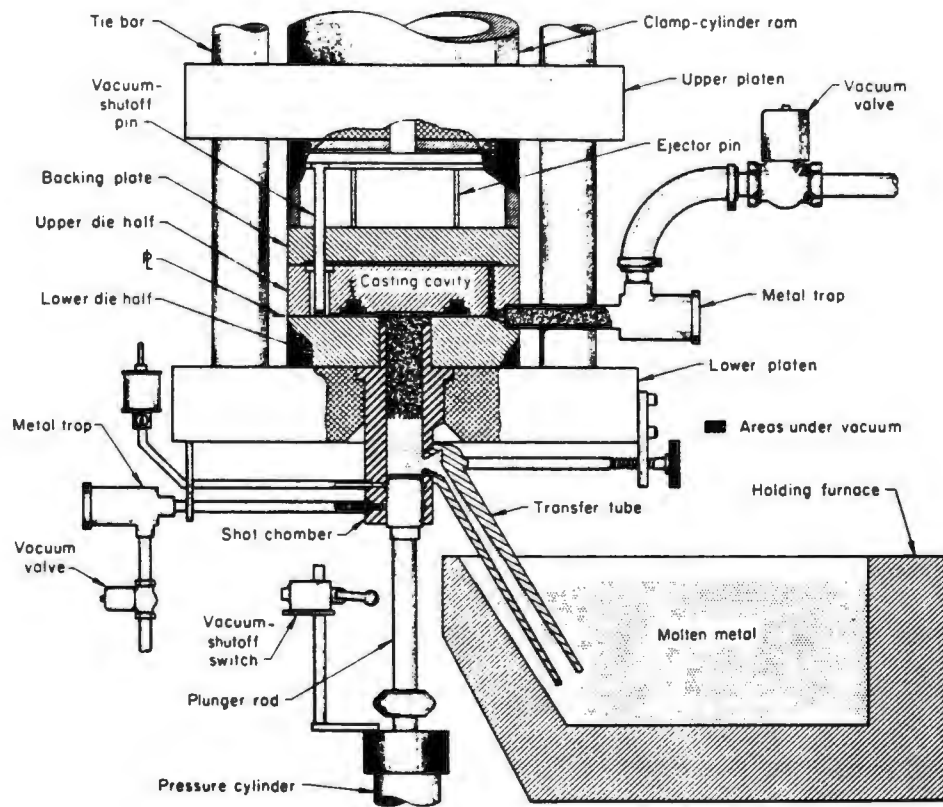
Vertical Cold-Chamber Die Casting Machine with the Die Parting-Line in the Horizontal Plane (Reprinted from [12])
